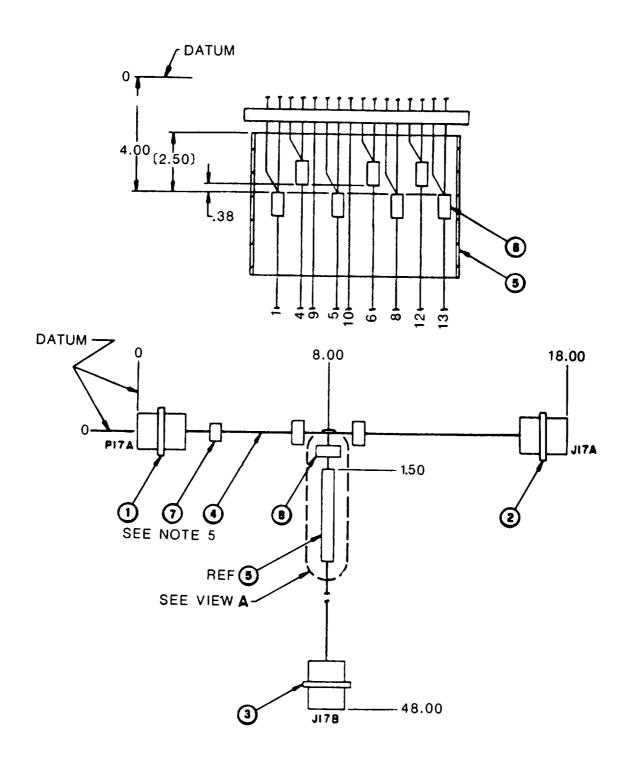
Breakout Cable (Sheet 1 of 2)
